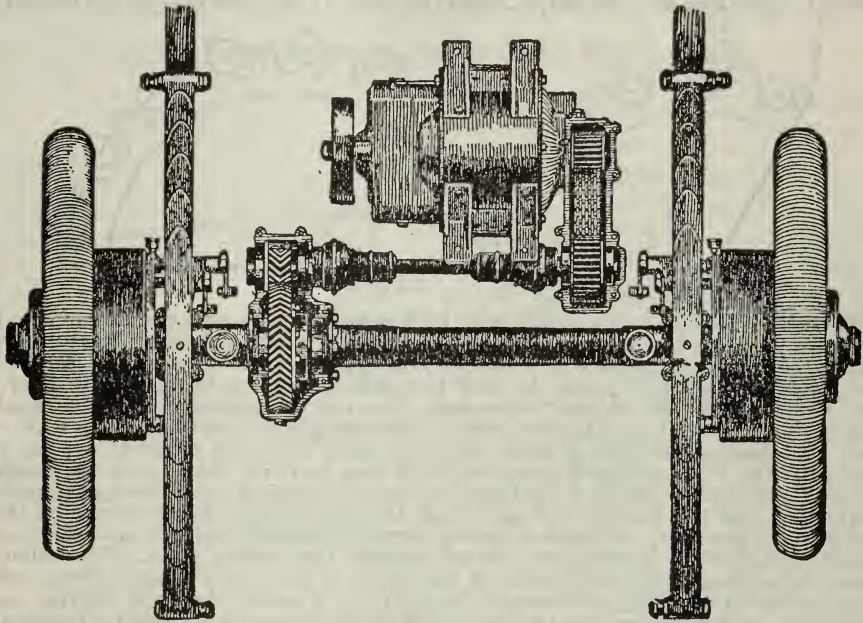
,070.—Waverly double reduction gear or combination herringbone gear and "silent" chain. *In construction* the motor shaft is parallel to the intermediate or jack shaft and drive shaft. Two universal joints are used, so as to give freedom of motion in any direction. The motor weight is above the springs. The first reduction is by the silent chain enclosed in a casing at end of motor; the second reduction is through the herringbone gear in the axle.
